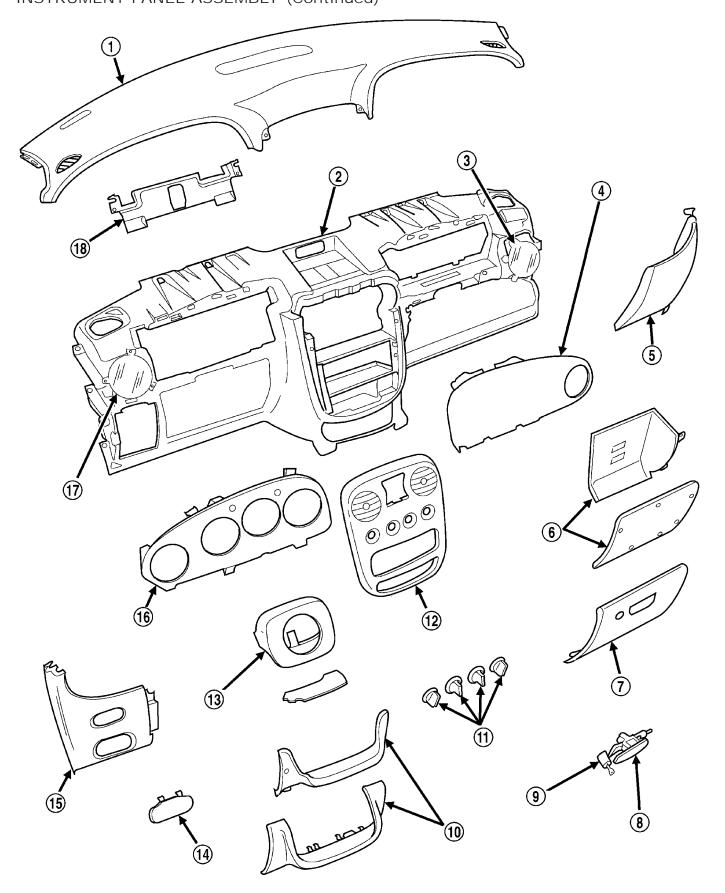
INSTRUMENT PANEL ASSEMBLY
